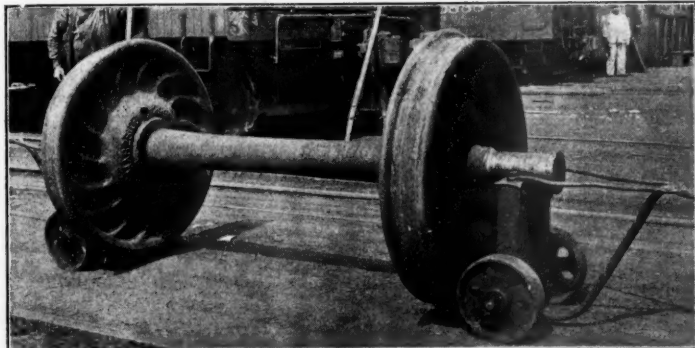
Trucks for Transporting and Pulling Mounted Wheels Under Car.
